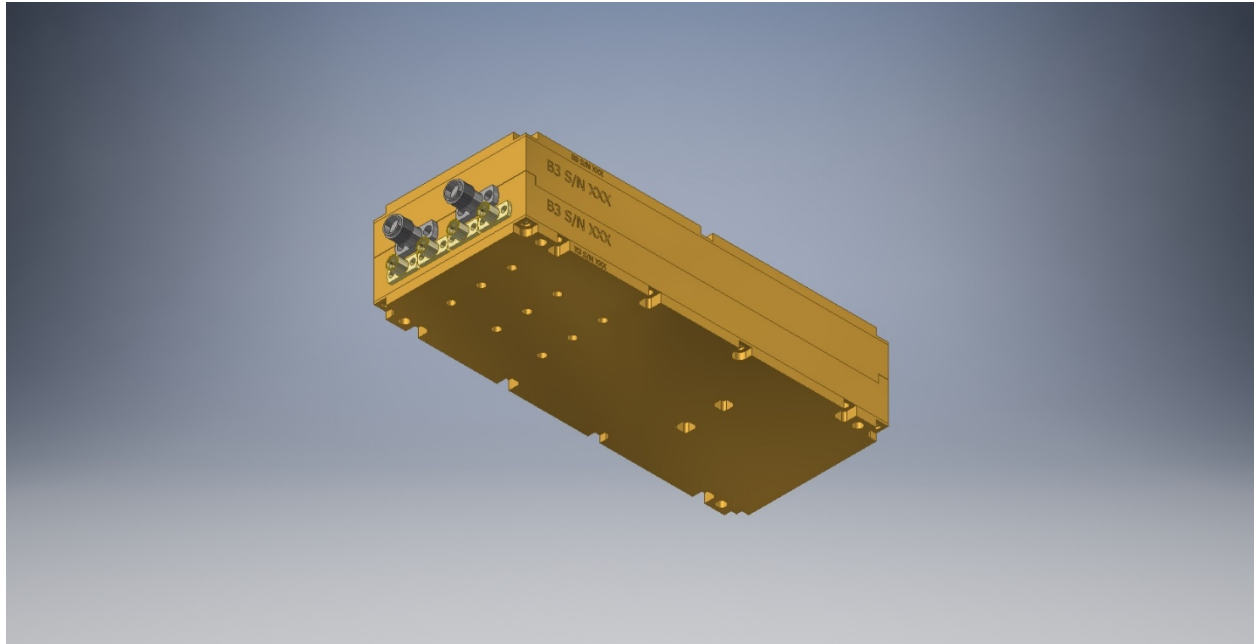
Preliminary design drawing of a coaxial Band 3 IRD module.
